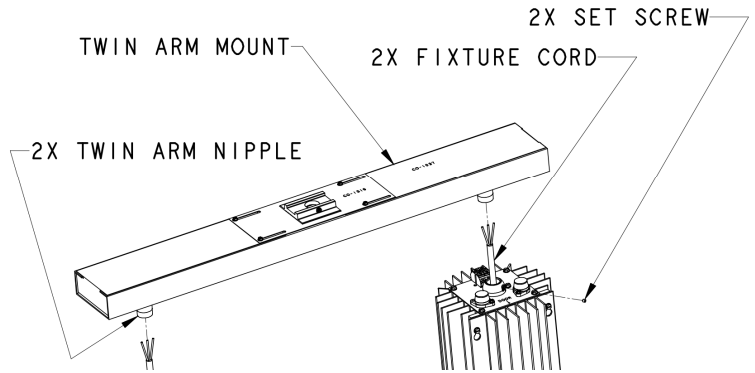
Twin Arm Fixture Mounting and Wiring
